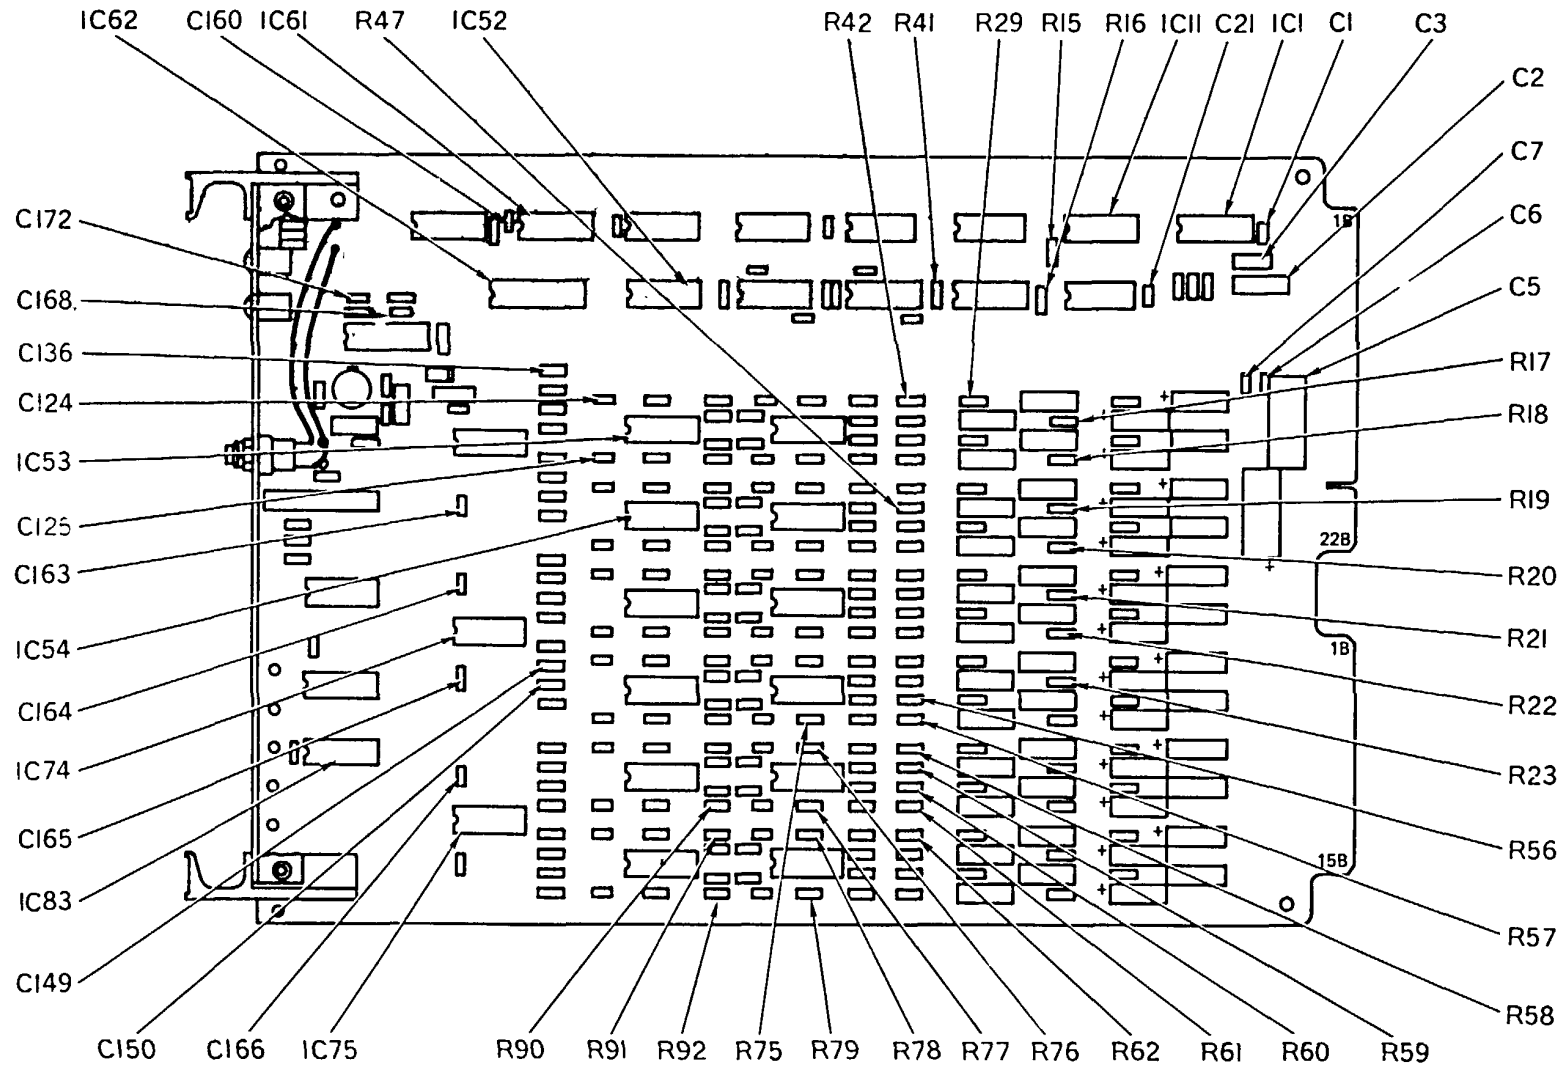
PCD unit parts location diagram (sheet 2 of 6).
